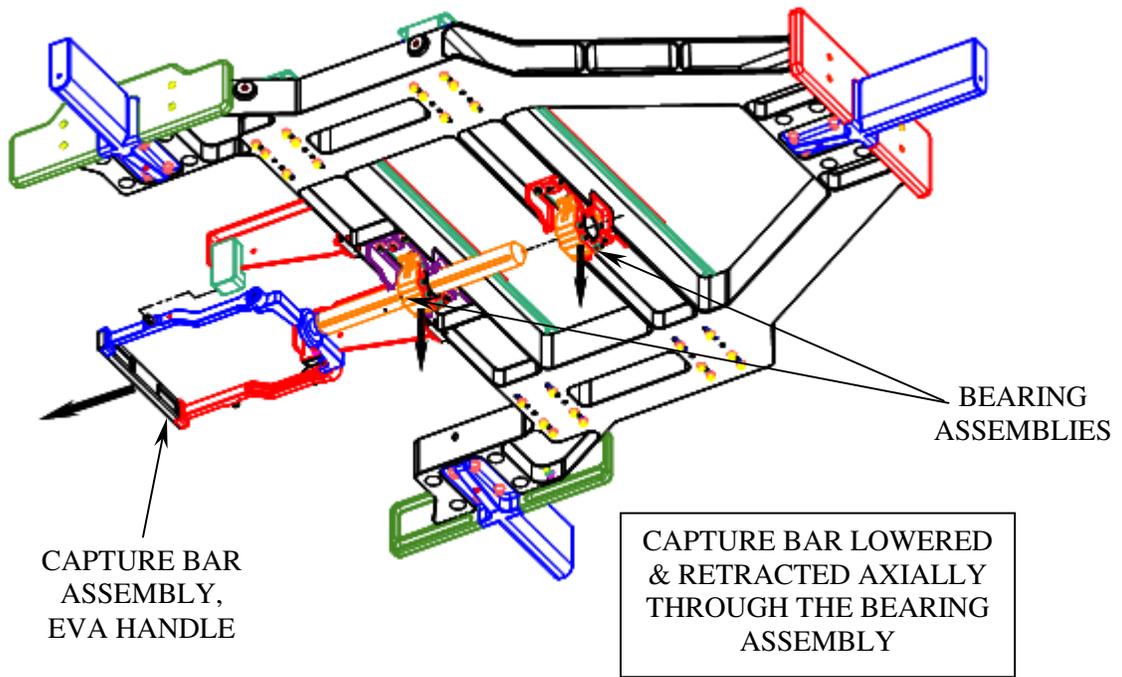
Capture Bar Assembly from AMS-02 Passive PAS
